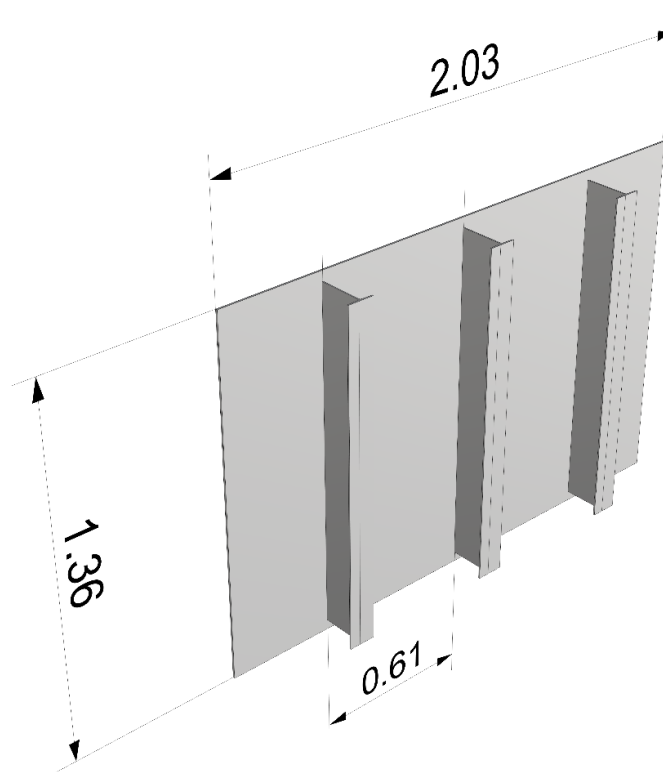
CAD drawing of the ex-HMCS IROQUOIS panel (shown in metres). Perimeter bars and stiffener end plates are not shown.
